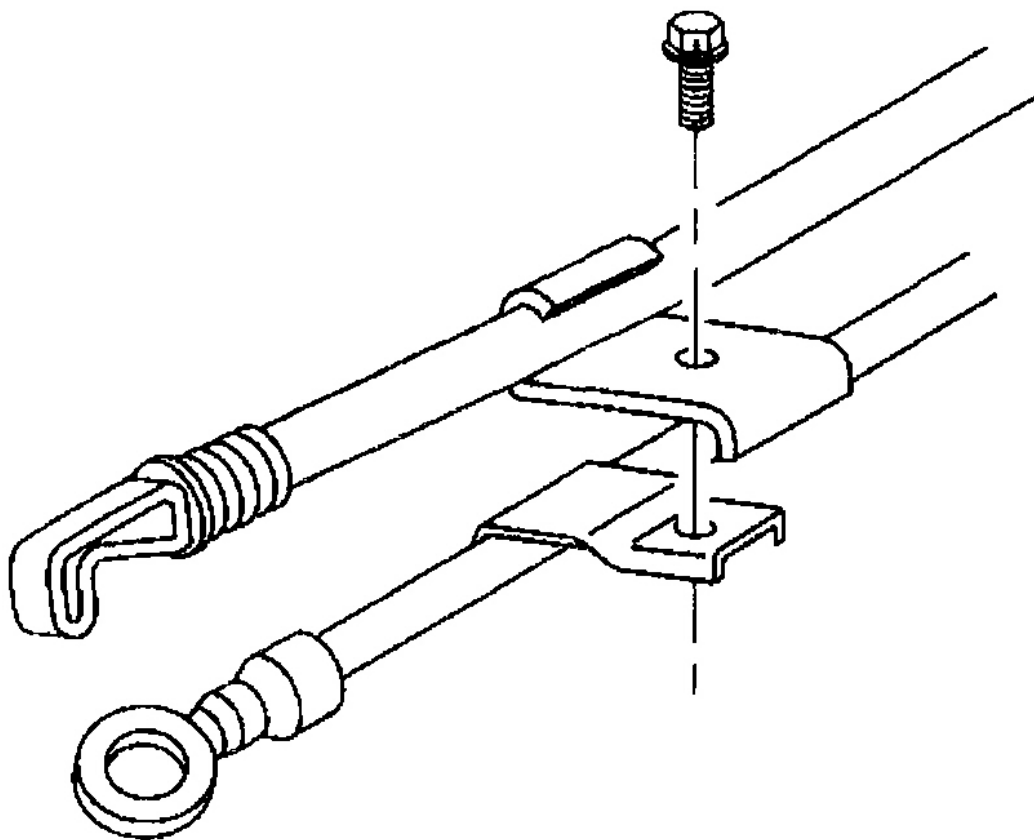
Installing Oil Level Indicator Tube Half To Bottom Half
